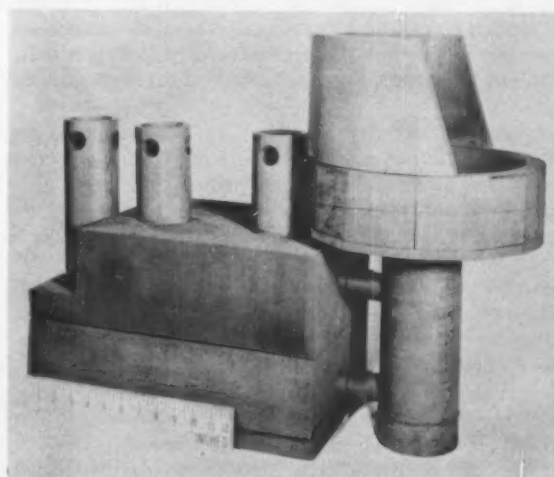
Assembled rammed graphite mold for vision block rotor.
